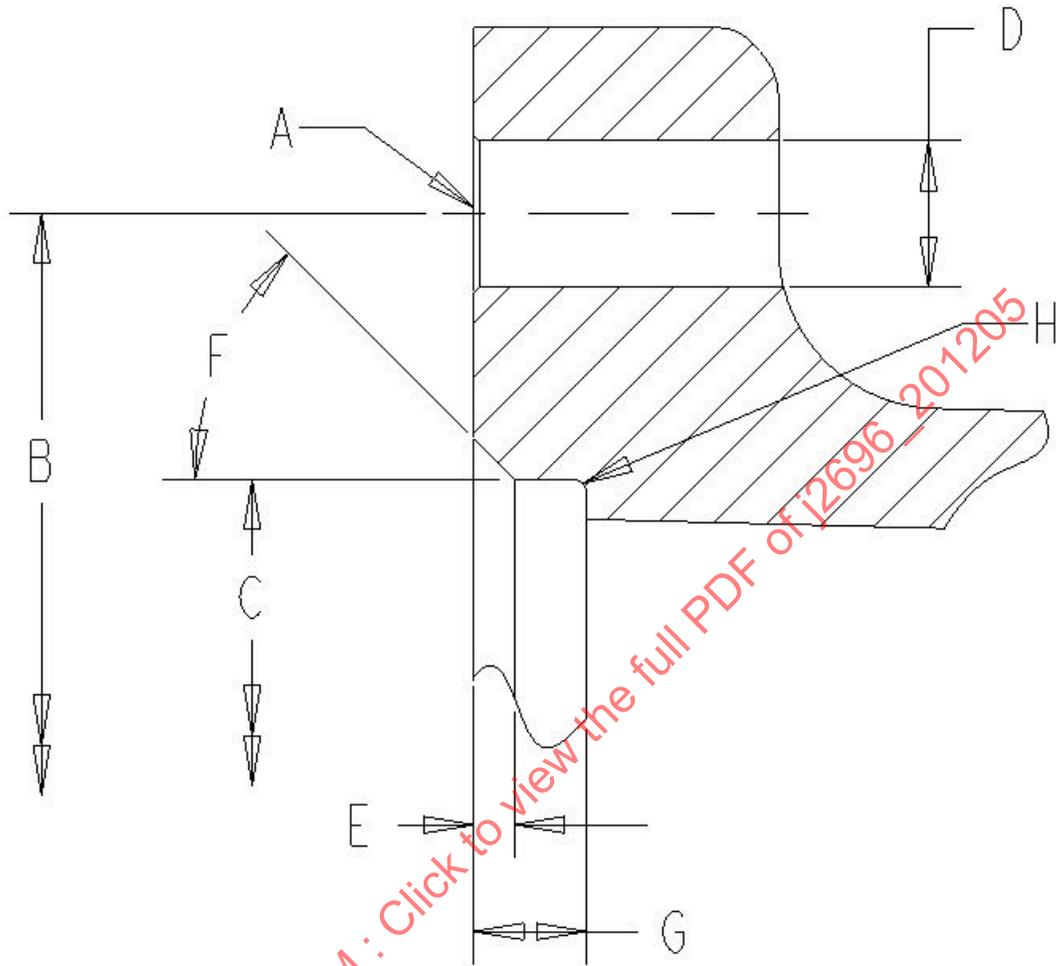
ROTOR INTERFACE DIMENSIONS - U SECTION ROTORS
